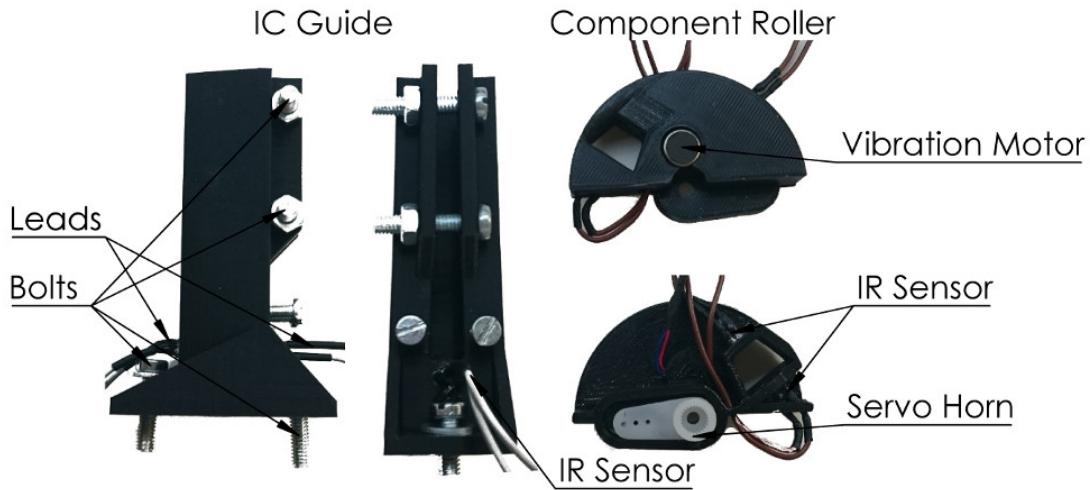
Picture of the 3D printed IC guide and roller after assembly.
